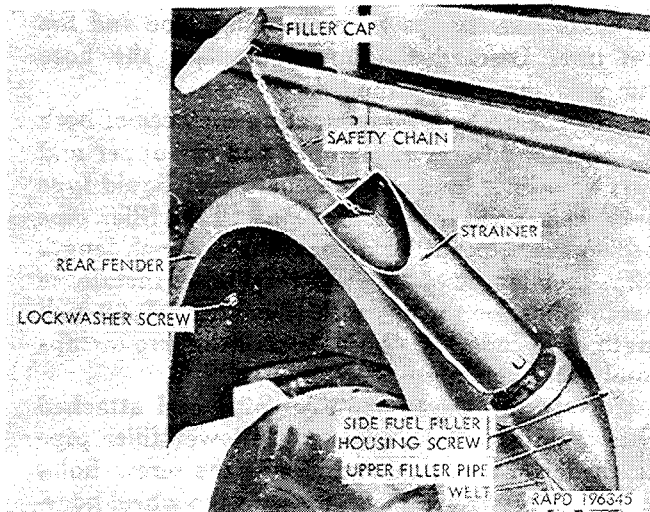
Fuel filler cap, strainer, and upper filler pipe.
